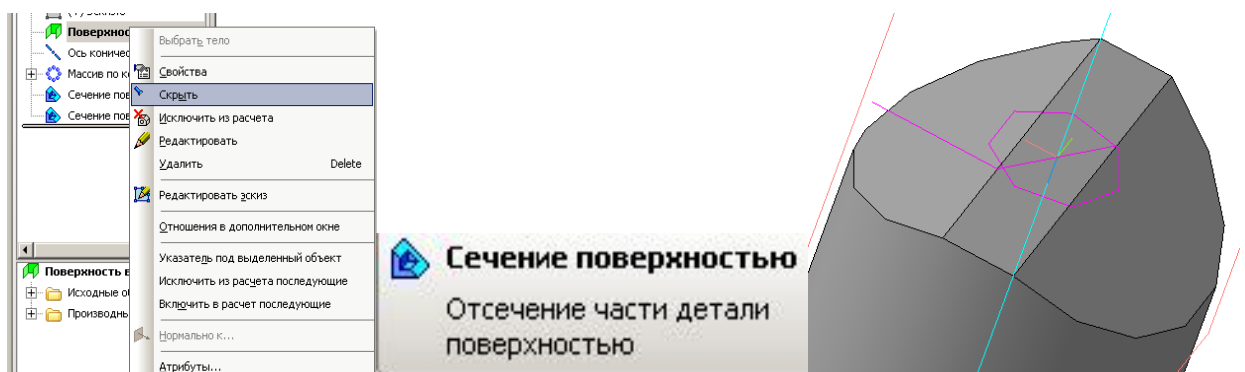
Construction of a wedge protrusion at the end of the drill blank
